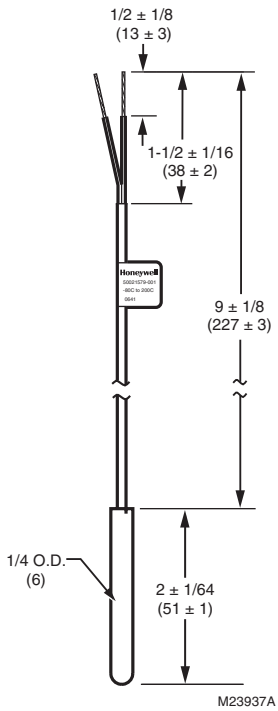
50021579-001 Dimensions in Inches (mm).
